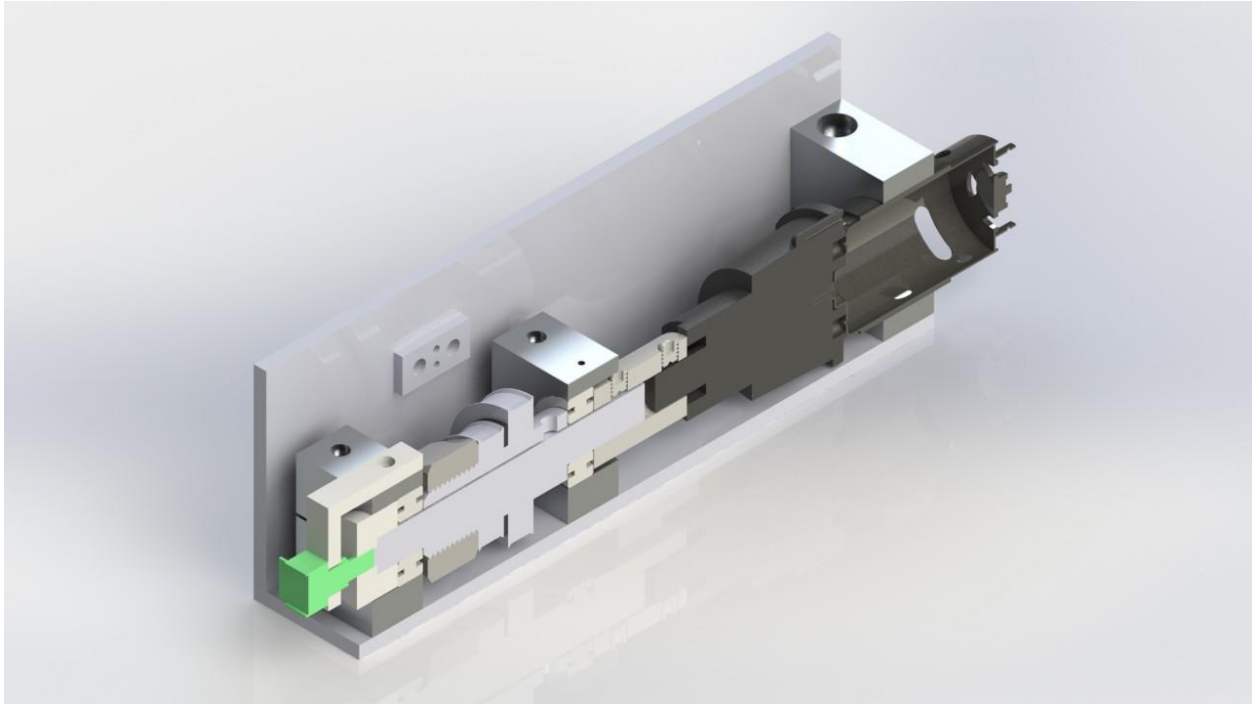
Elbow Motor Housing Revision 3 (Section View)
